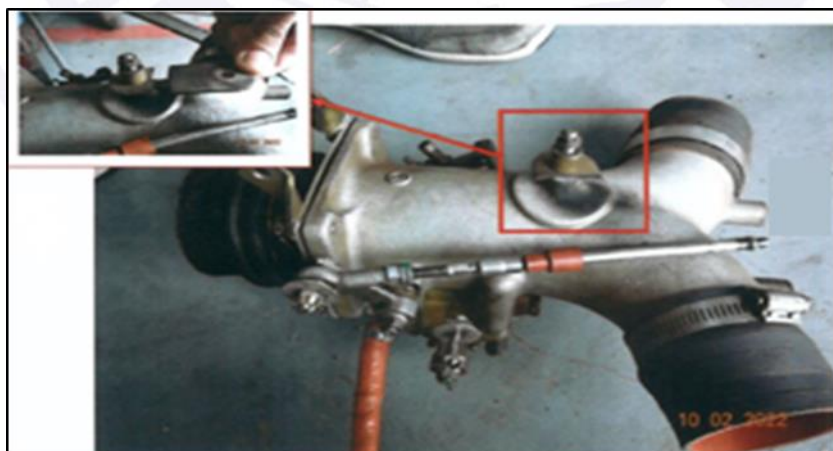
General view of the throttle body assembly (THROTTLE ASM-AIR), highlighting the broken mounting bracket.
